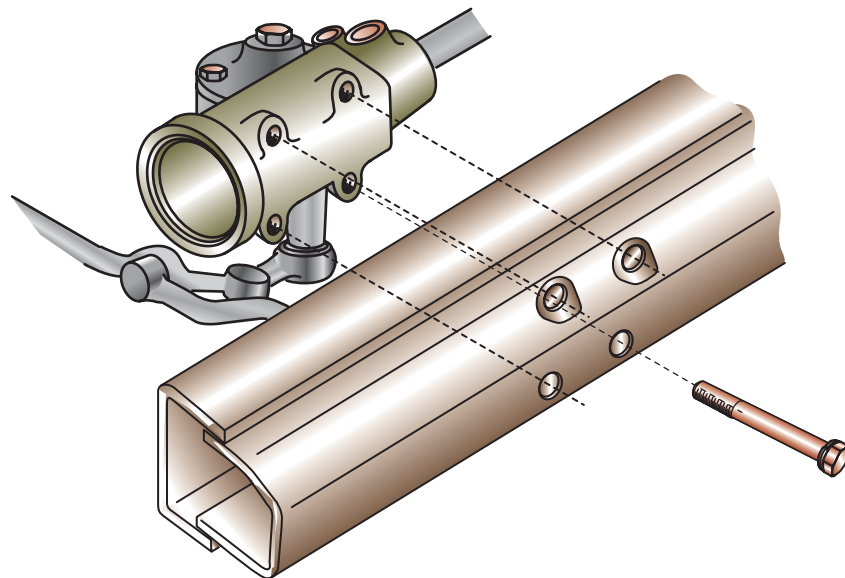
Steering gear mounting on the vehicle frame.
